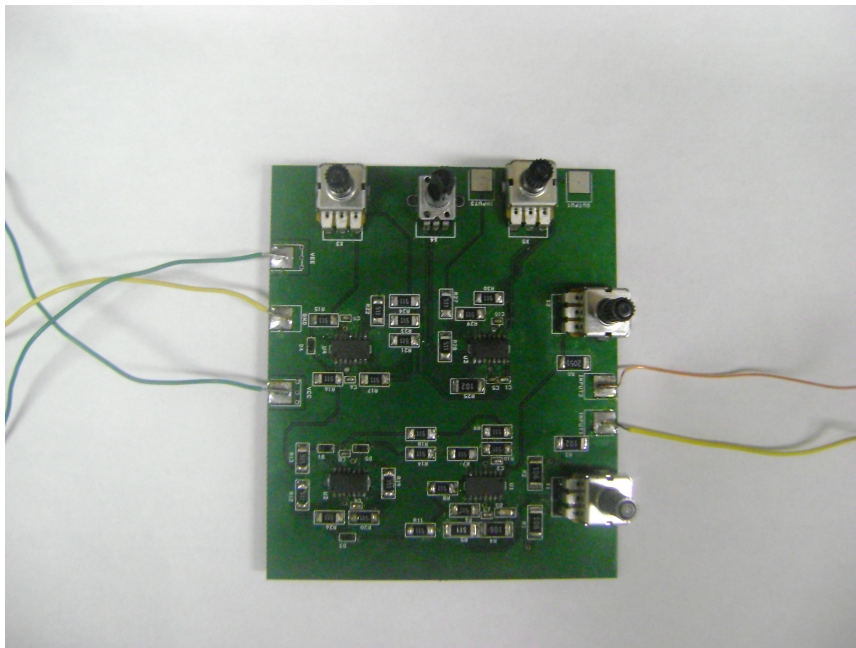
Chaotic actuator controller implemented on a PCB.
